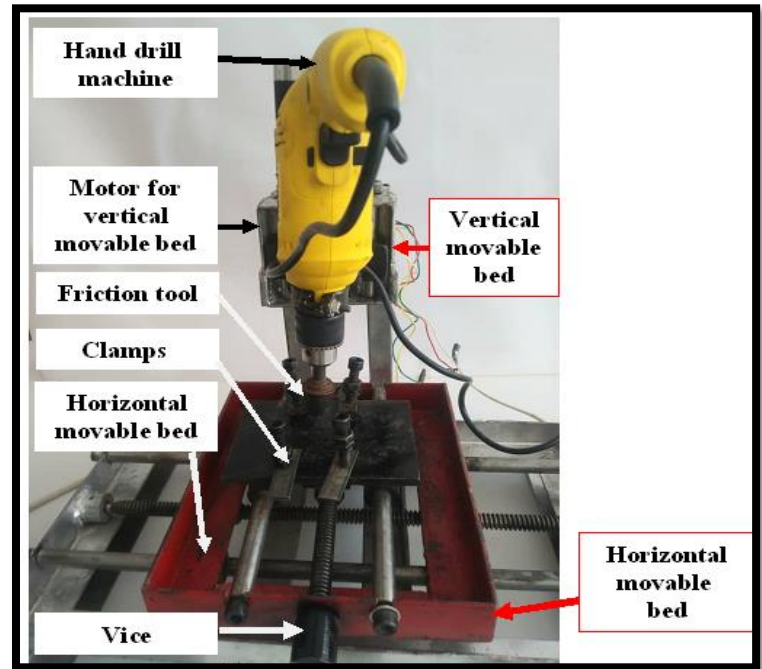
Mechanical part of a semi-automated friction stir welding machine.
